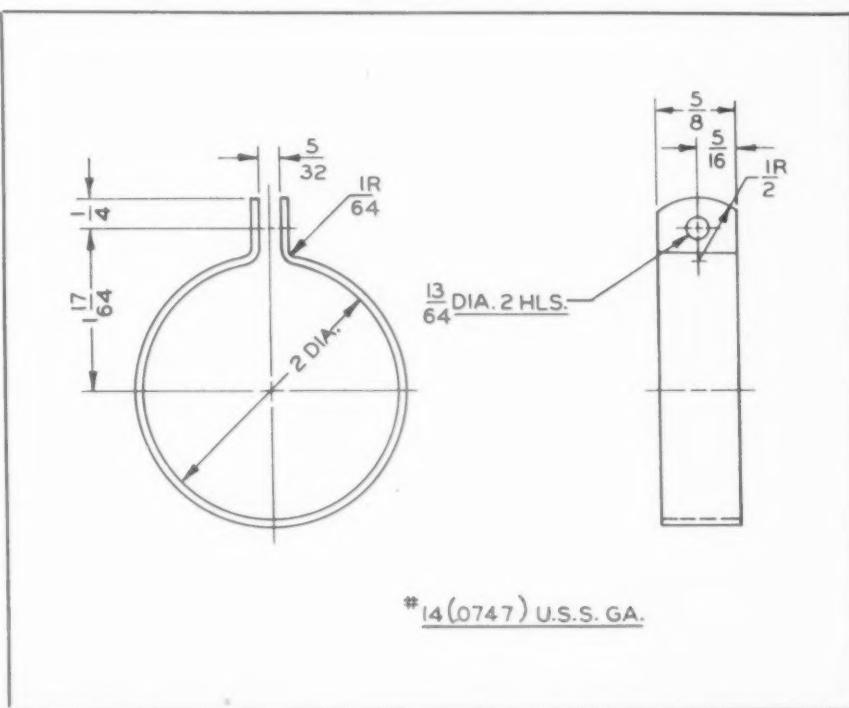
Design of a typical rounded part to be formed in a power press. Accuracy of dimensions of parts in production depends upon layout of shape to be formed by first forming die.
